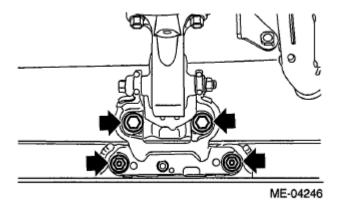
Locating Bolt And Engine Mounting Nut Courtesy of SUBARU OF AMERICA, INC.
